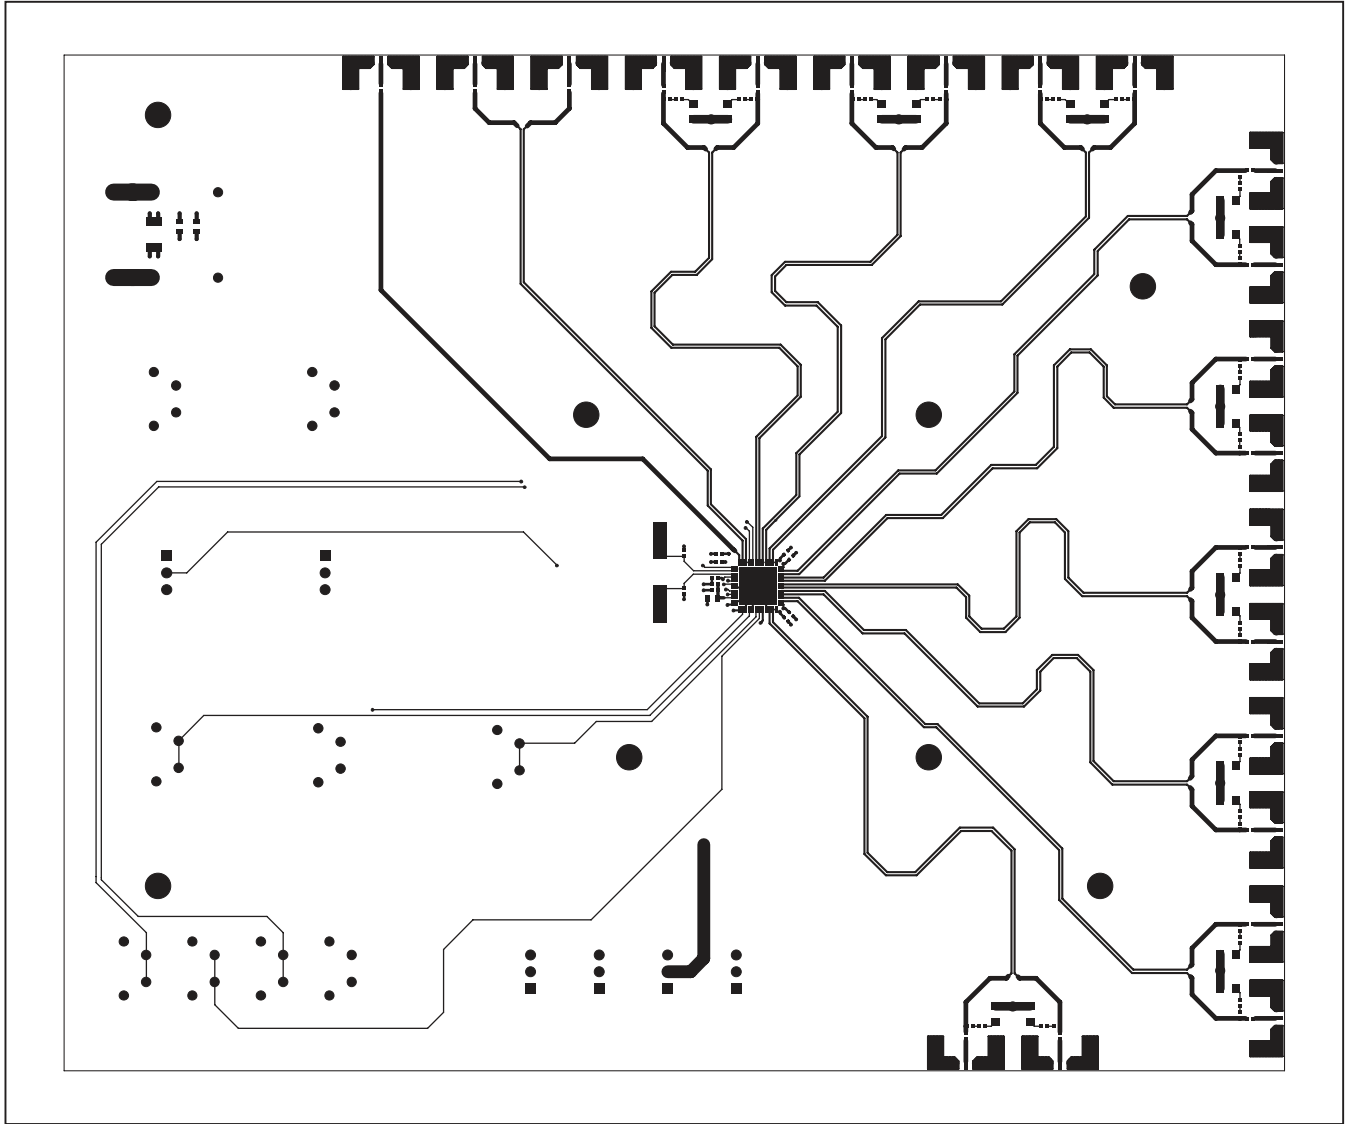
MAX3612 EV Kit PCB Layout—Component Side
